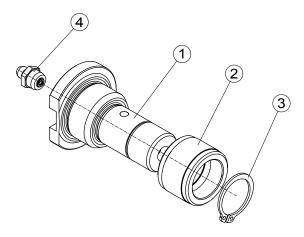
Principle drawing of the Slip Retainer Pin Assembly
